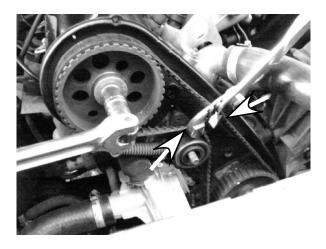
Or, if you forgot, you can grip both sides (arrows) of the *old* belt near the tensioner with large pliers. Simultaneously, use a long-handled wrench to break free the 17 mm bolt.
